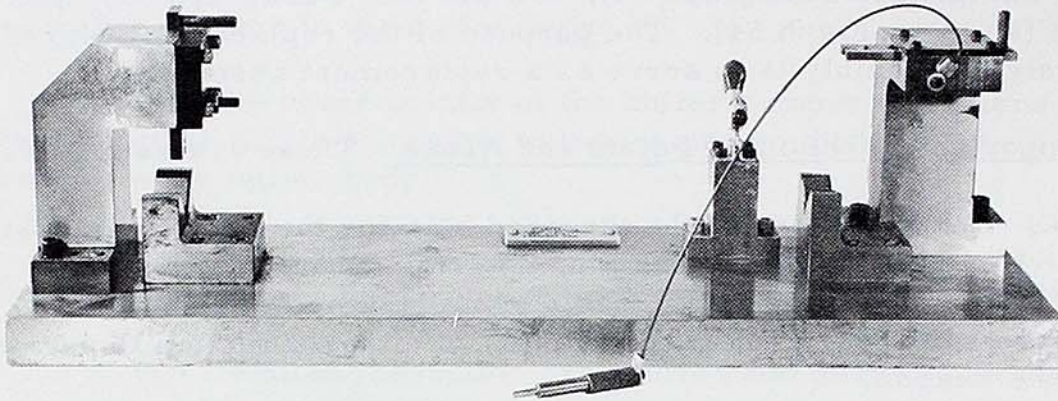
Location Gage Positioned to Receive the Replacement Barrel and Front Sight Assembly.
